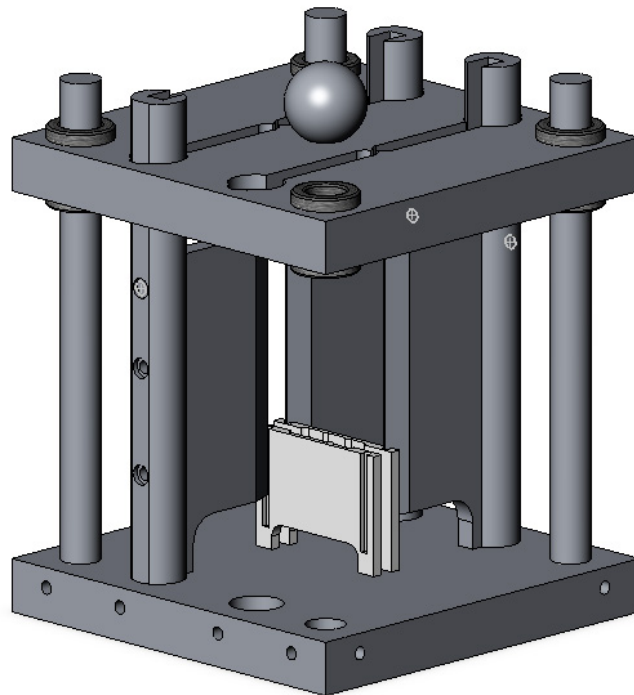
ARL-like fixture with supporting plates for narrow specimens
